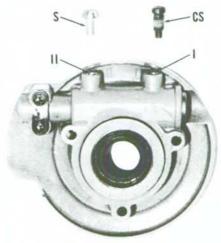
View of oil pump used on some models. Oil pump output is determined by installation of cam screw (CS) in hole (I) or hole (II). Refer to text.
